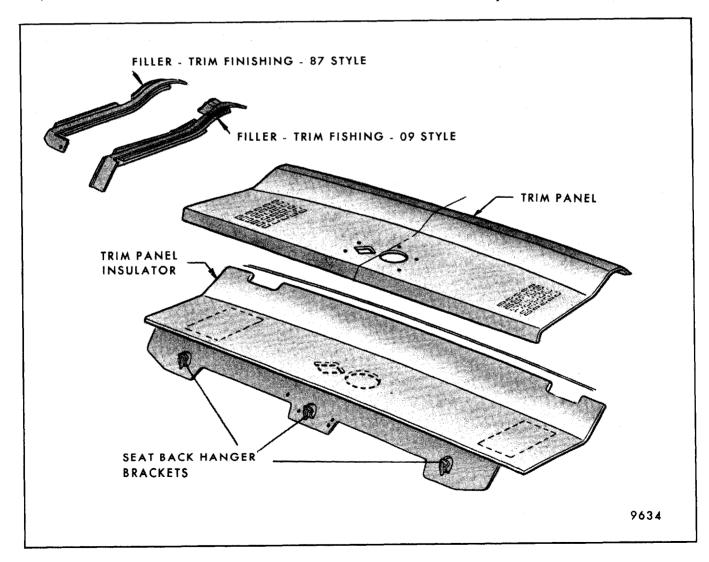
Rear Seat-to-Back Window Trim Panel and Insulator - A-09,87 Styles Shown - Others Similar
